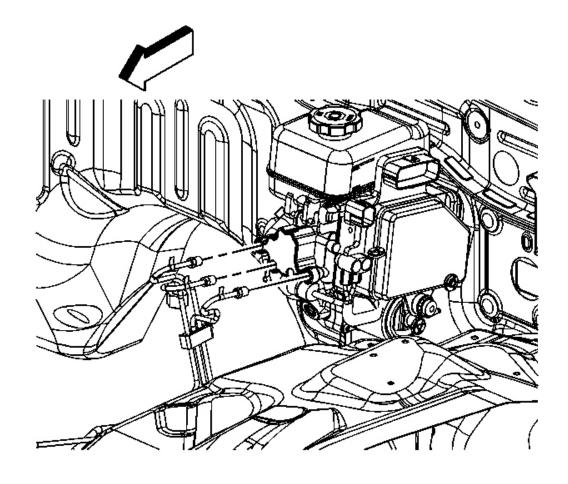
Identifying Rear And Left Front Brake Pipes At Brake Master Cylinder Courtesy of GENERAL MOTORS CORP.
